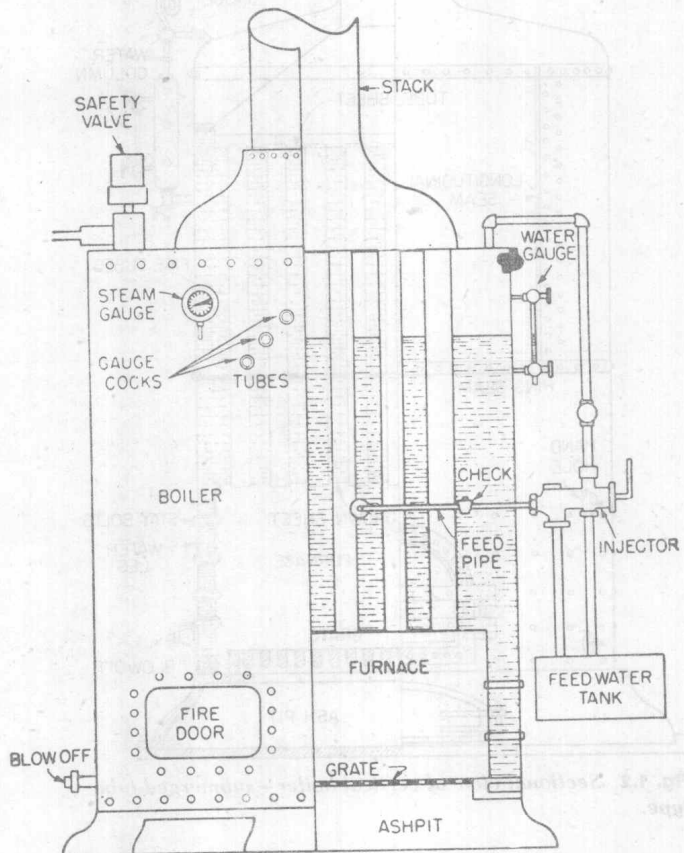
Sectional view of vertical boiler—exposed-tube type.
